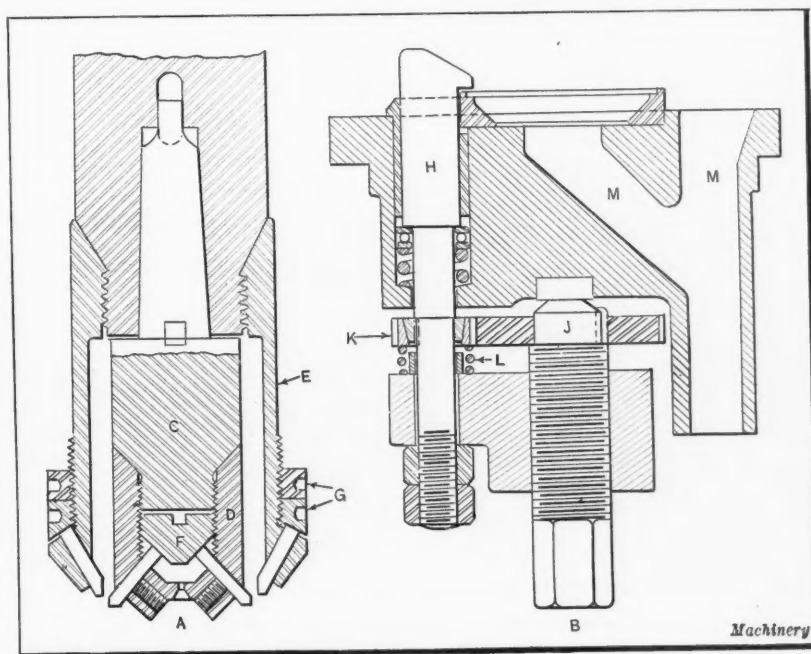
(A) Sectional View of the Spindle Nose and Cutter-holding Members (B) Chuck-operating Mechanism
